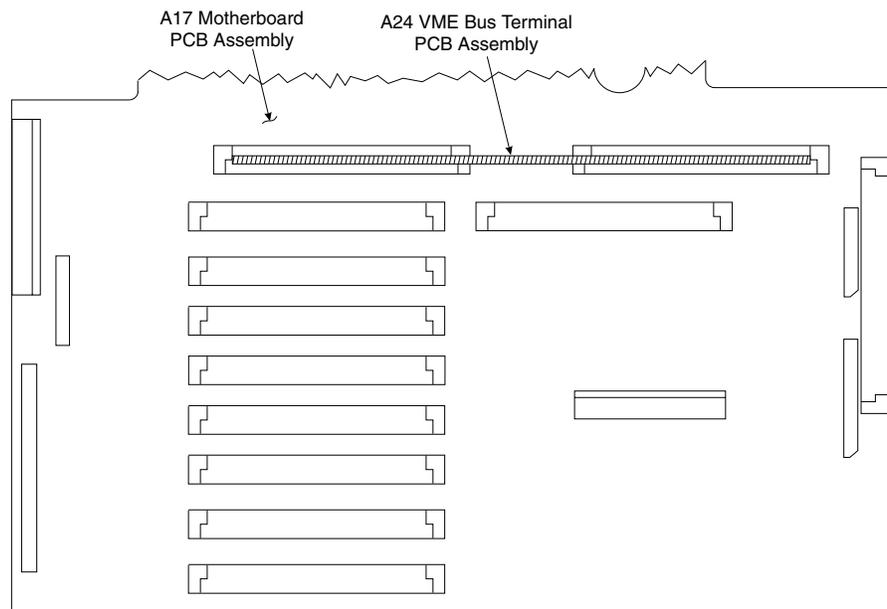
Location of the A24 VME Bus Terminator PCB Assembly
